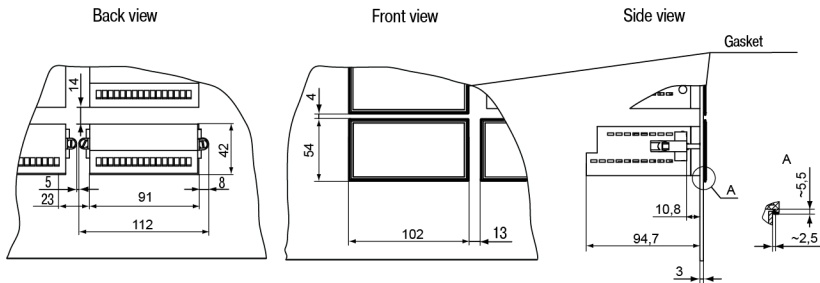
The device in Щ2 housing mounted in the control panel thickness of 3 mm
